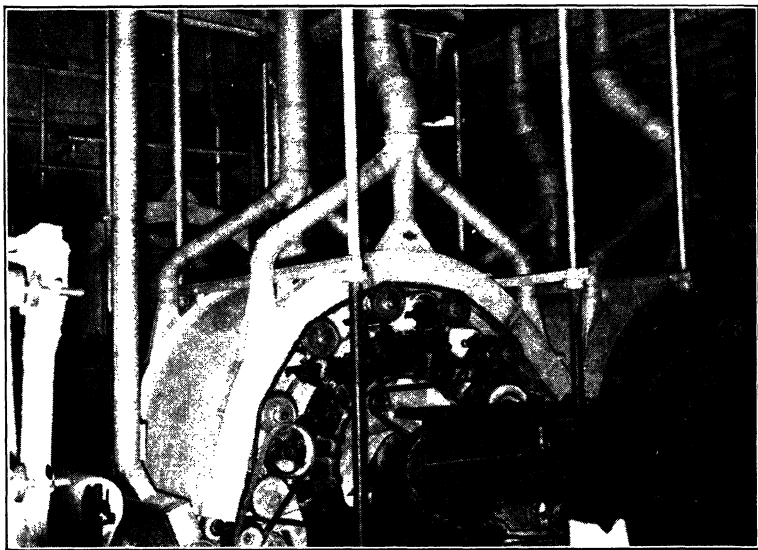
Improved Hood at a Carding Machine (*Courtesy Connecticut Department of Health*)
